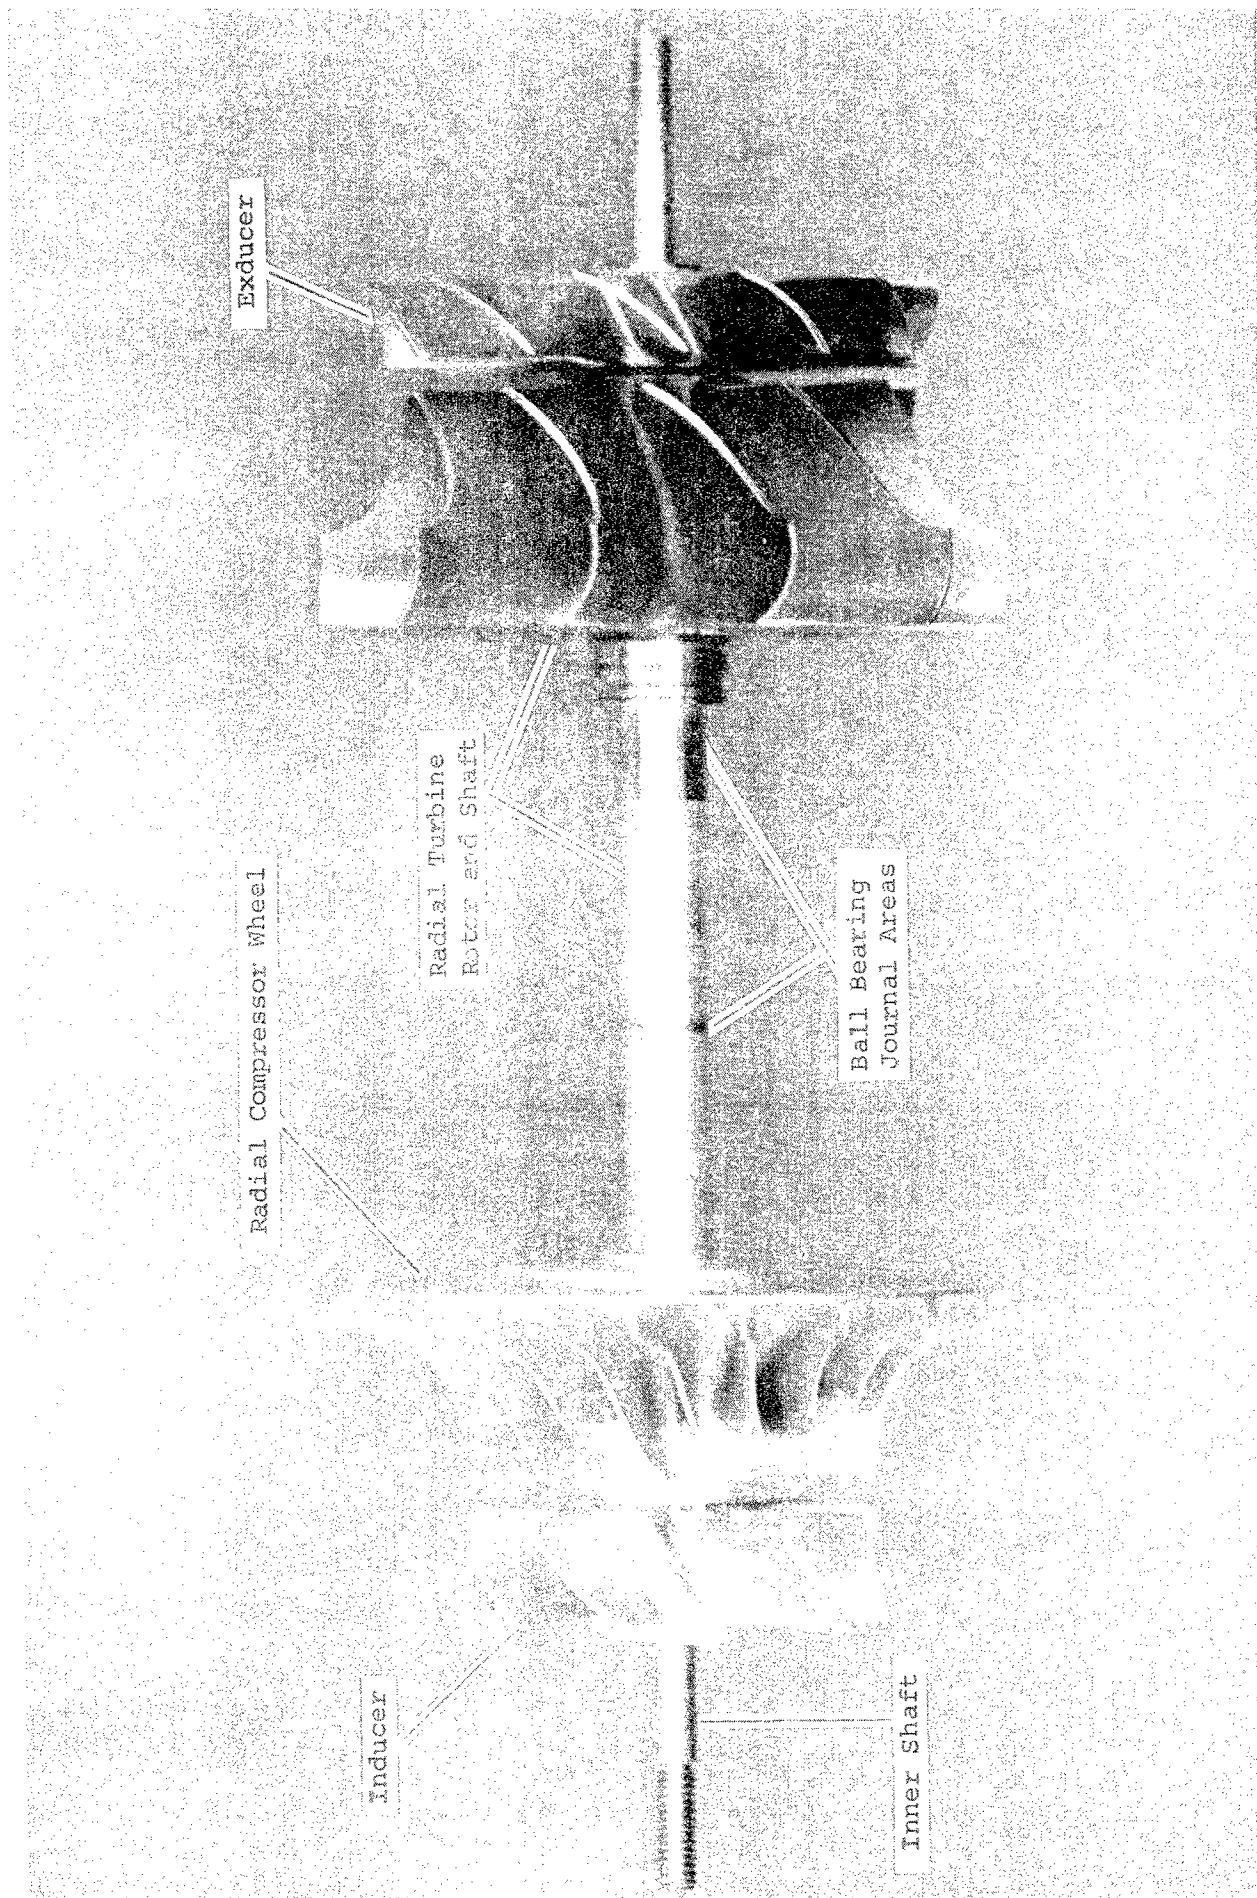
Preliminary assembly of inner and outer shaft rotating elements for new twin-spool turbocharger
